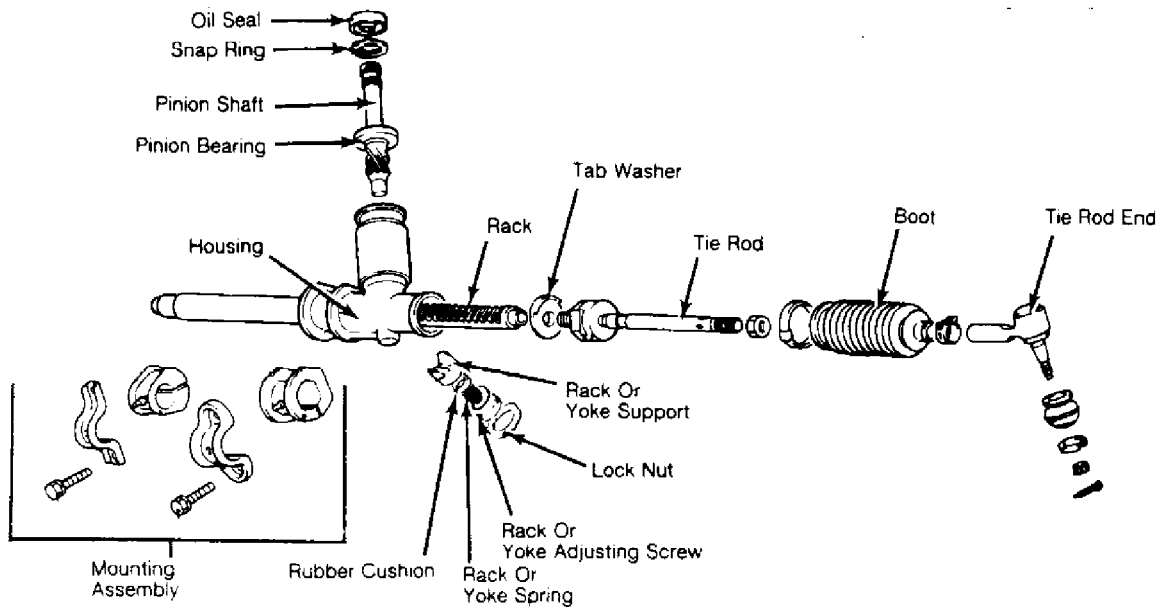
Exploded View of Manual Rack & Pinion Steering Gear (Typical)
